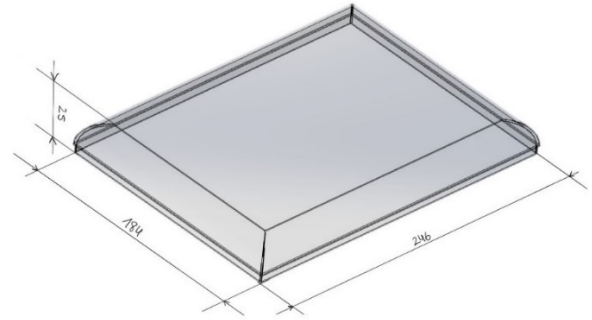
CAD model and dimensions for the cover chocolates packaging used for study cases
